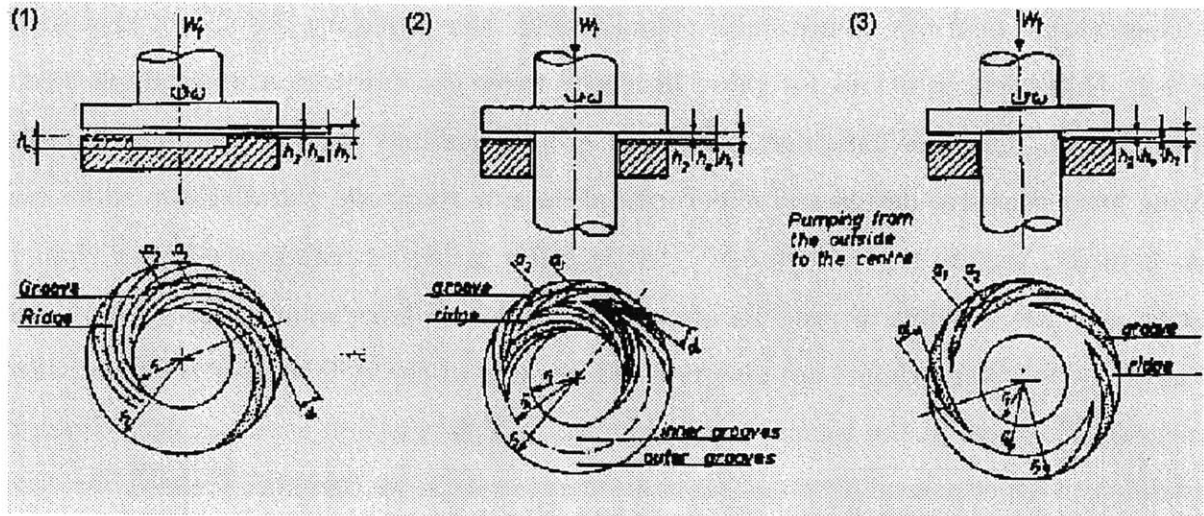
Other spiral groove bearings configurations (adapted from[47]): (1)Full flat spiral groove bearing without transverse flow, (2)Herringbone flat bearing, (3)Partially grooved flat spiral groove bearing.
